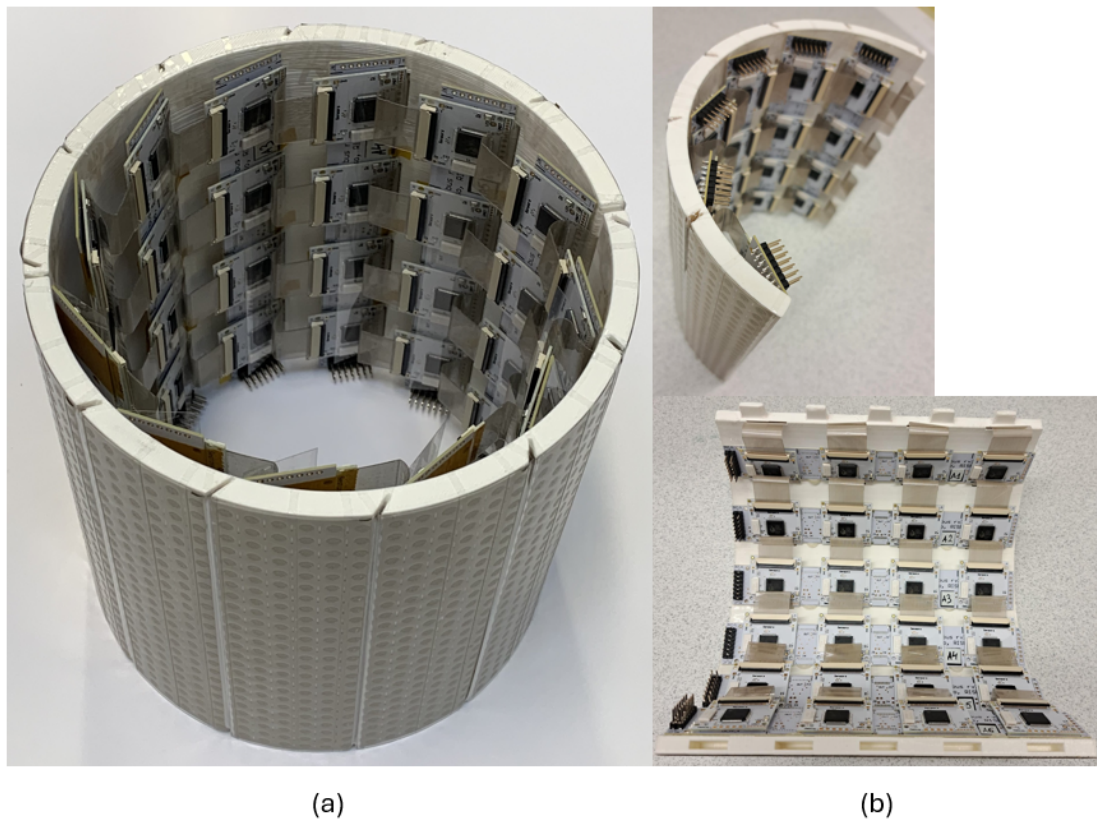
PeSkin cylindrical integration demonstrator. (a) External view of the assembled cover. (b) Internal view showing the arrangement of compact PSoC readout boards.
